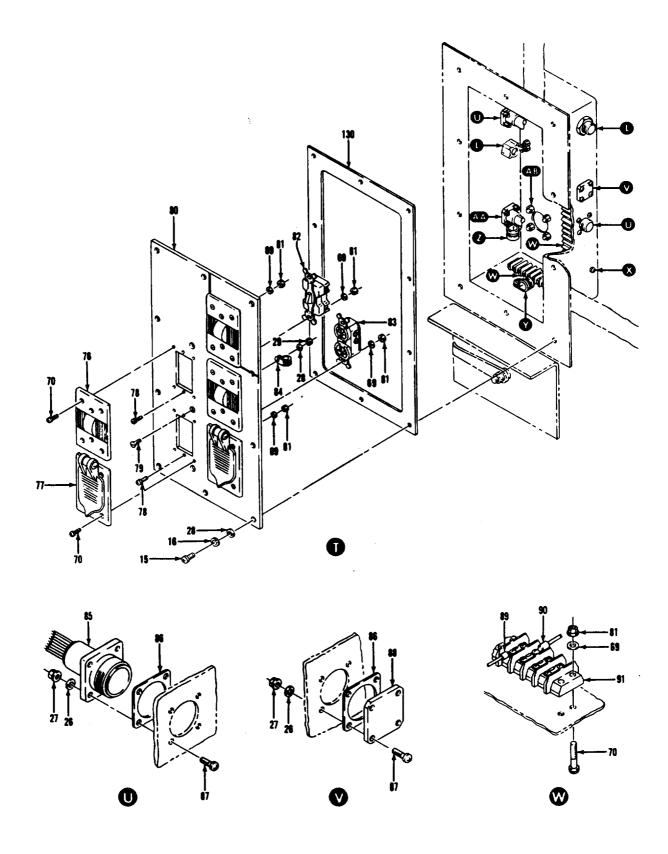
Electrical Equipment Installation (Sheet 8 of 19)
